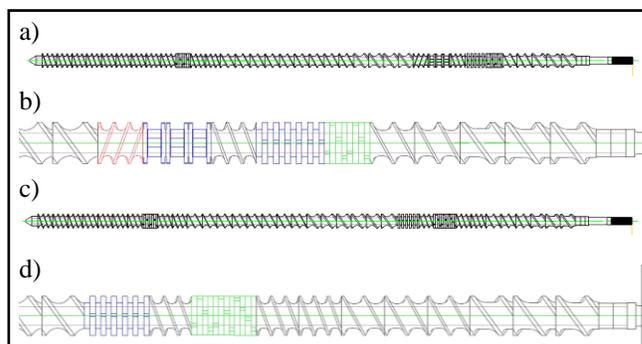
a) Aggressive melting zone screw design b) Aggressive melting zone closeup c) Extended melting zone Screw design d) Extended melting zone closeup.
